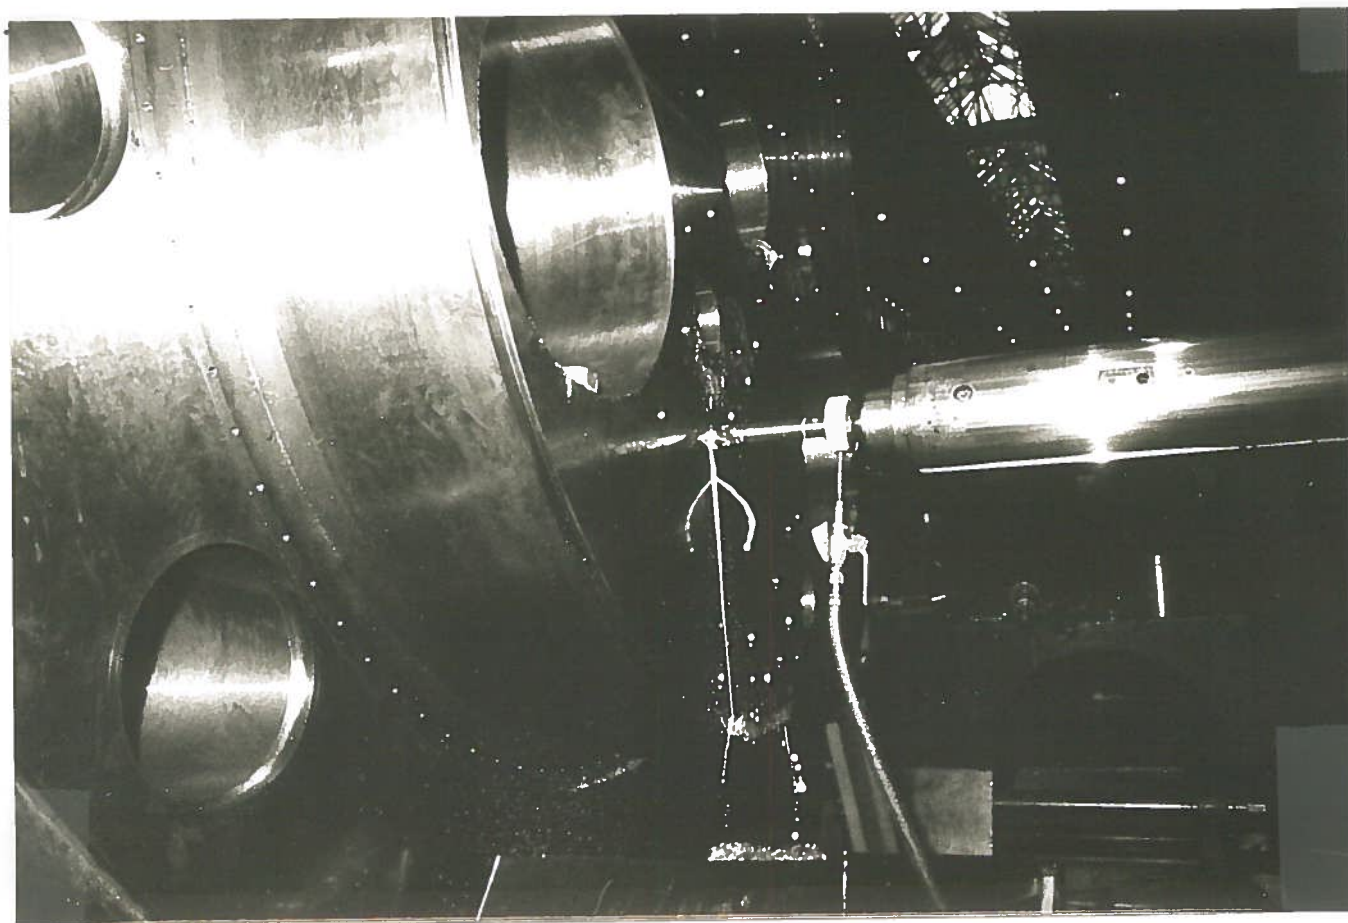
Close view of the finishing of trim coils holes on the pole cap.
